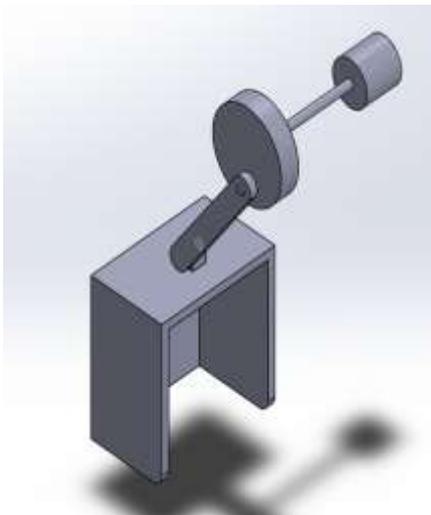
Assembly of Cap, Connecting Rod, Crank and Motor
